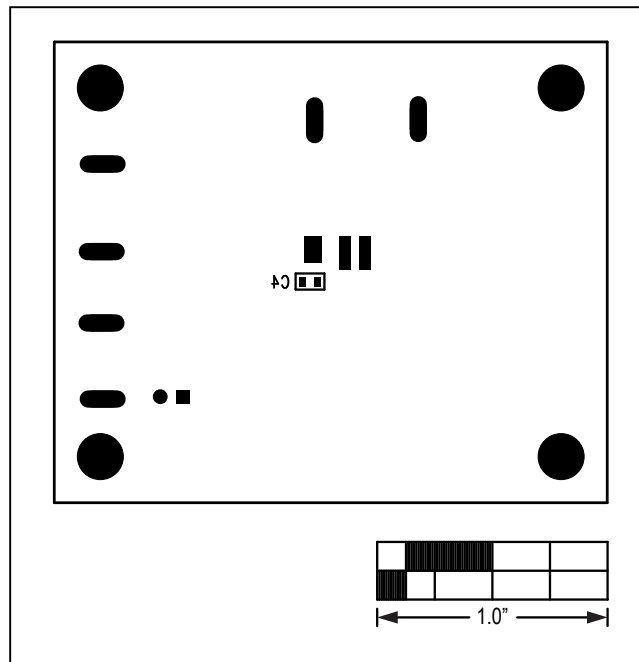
MAX17515 EV Kit PCB Layout—Bottom Silk Screen
